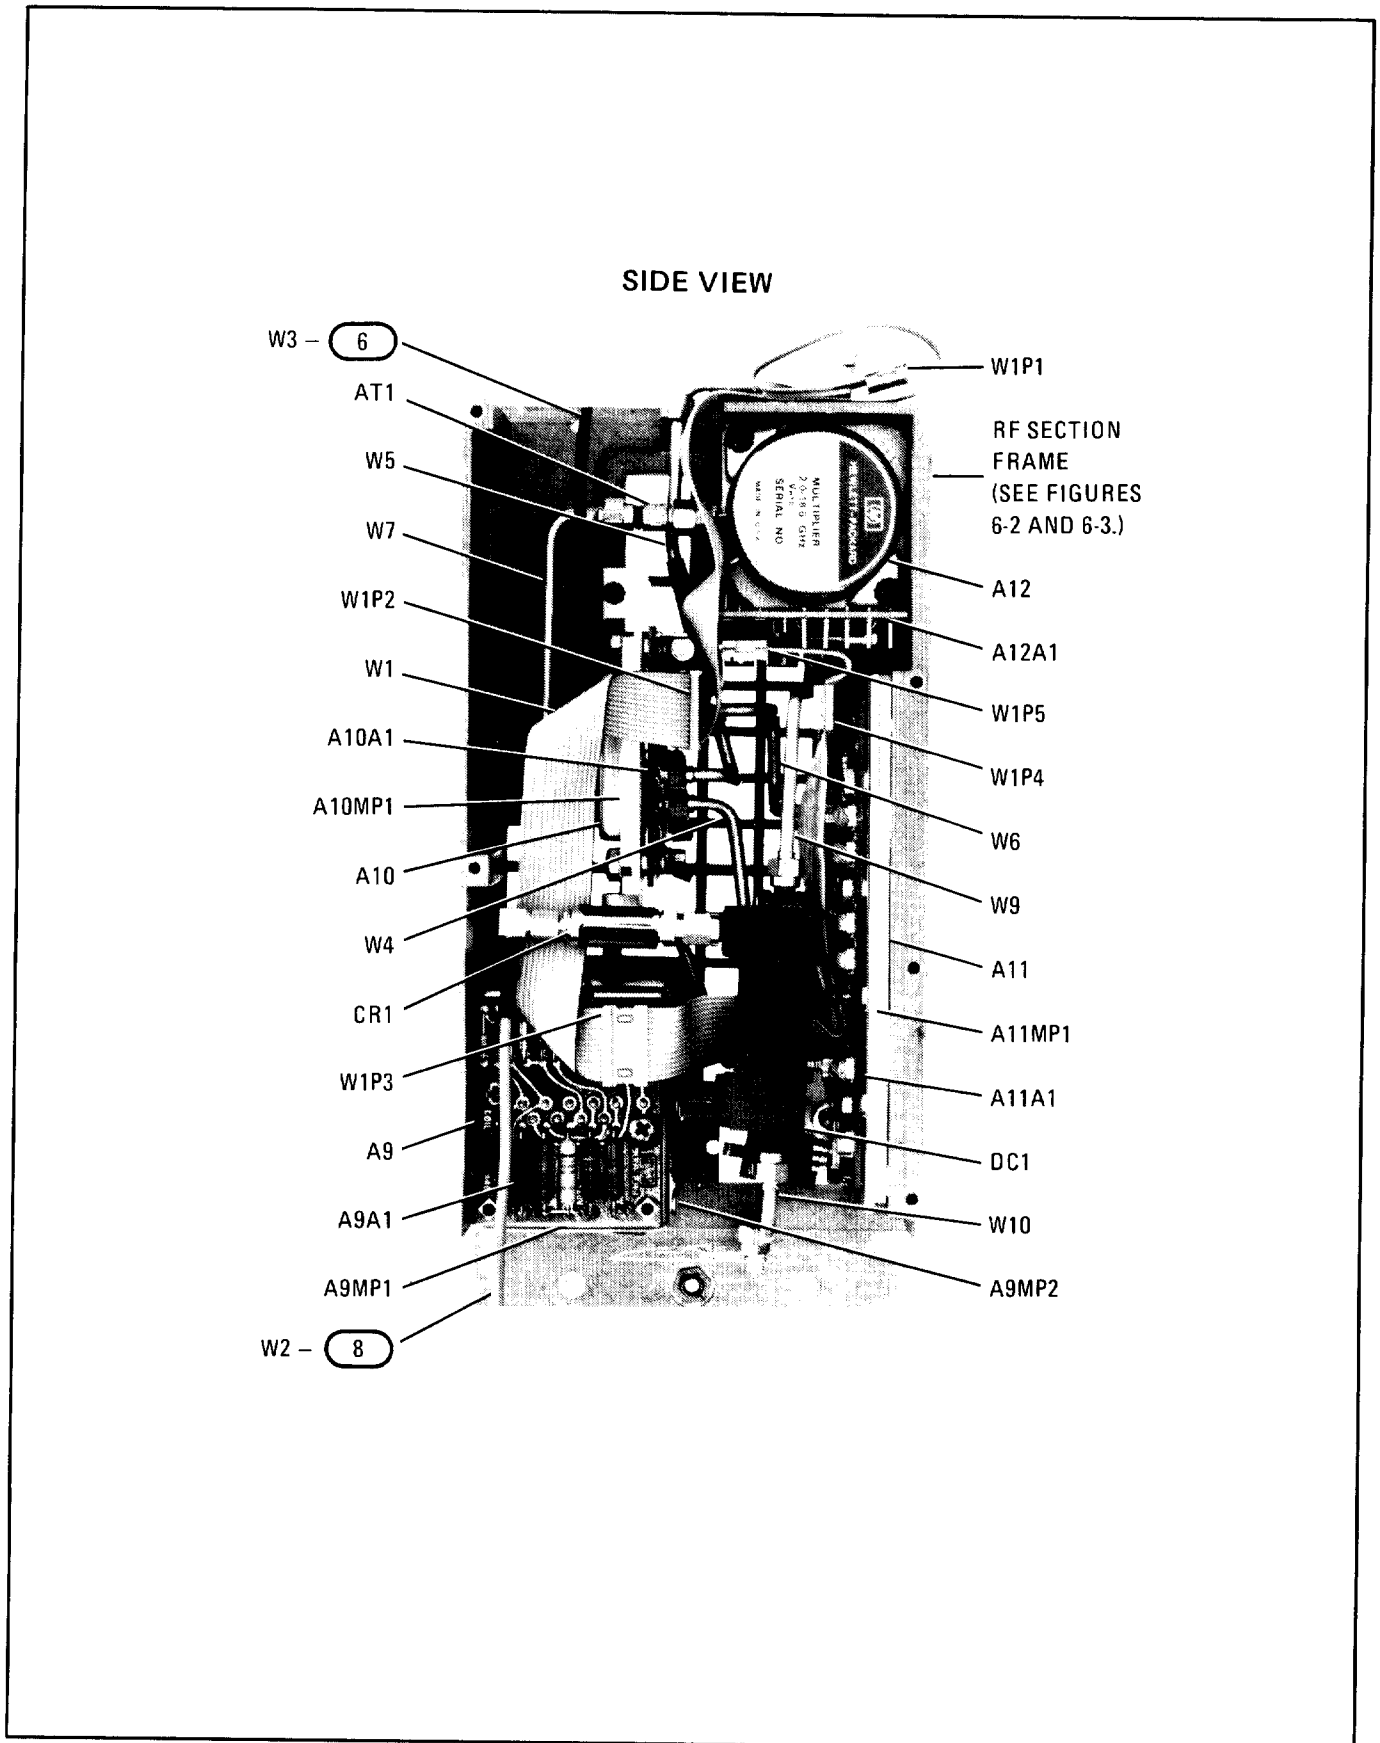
RF Section, Major Assembly and Component Locations (1 of 2)
